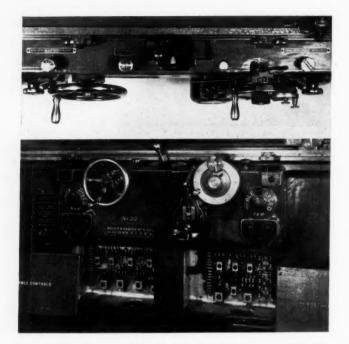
Headstock, table and "grind-true" control knobs as seen by operator; together with front view of bed, with table and headstock control panels uncovered
